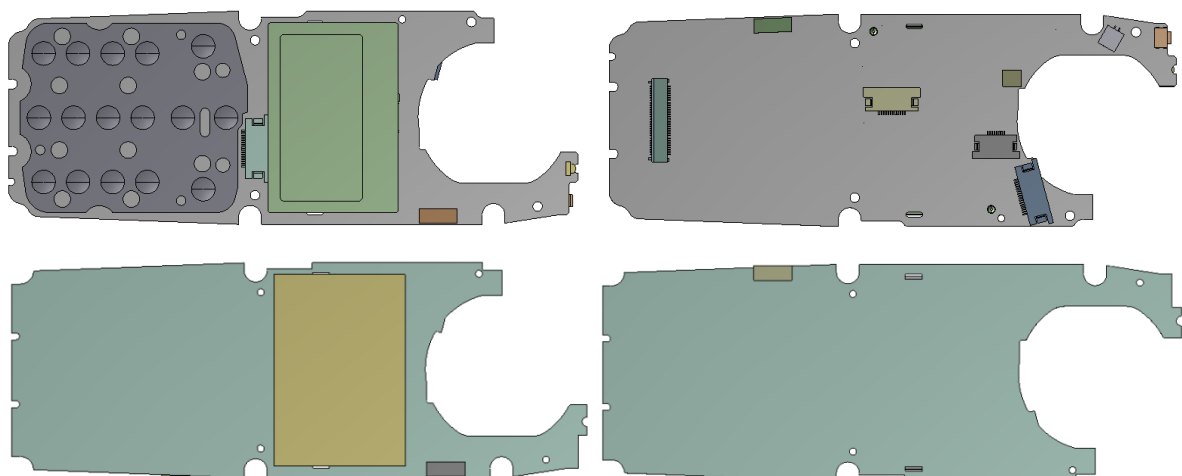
MMI board assembly before (top) and after (bottom) simplification
